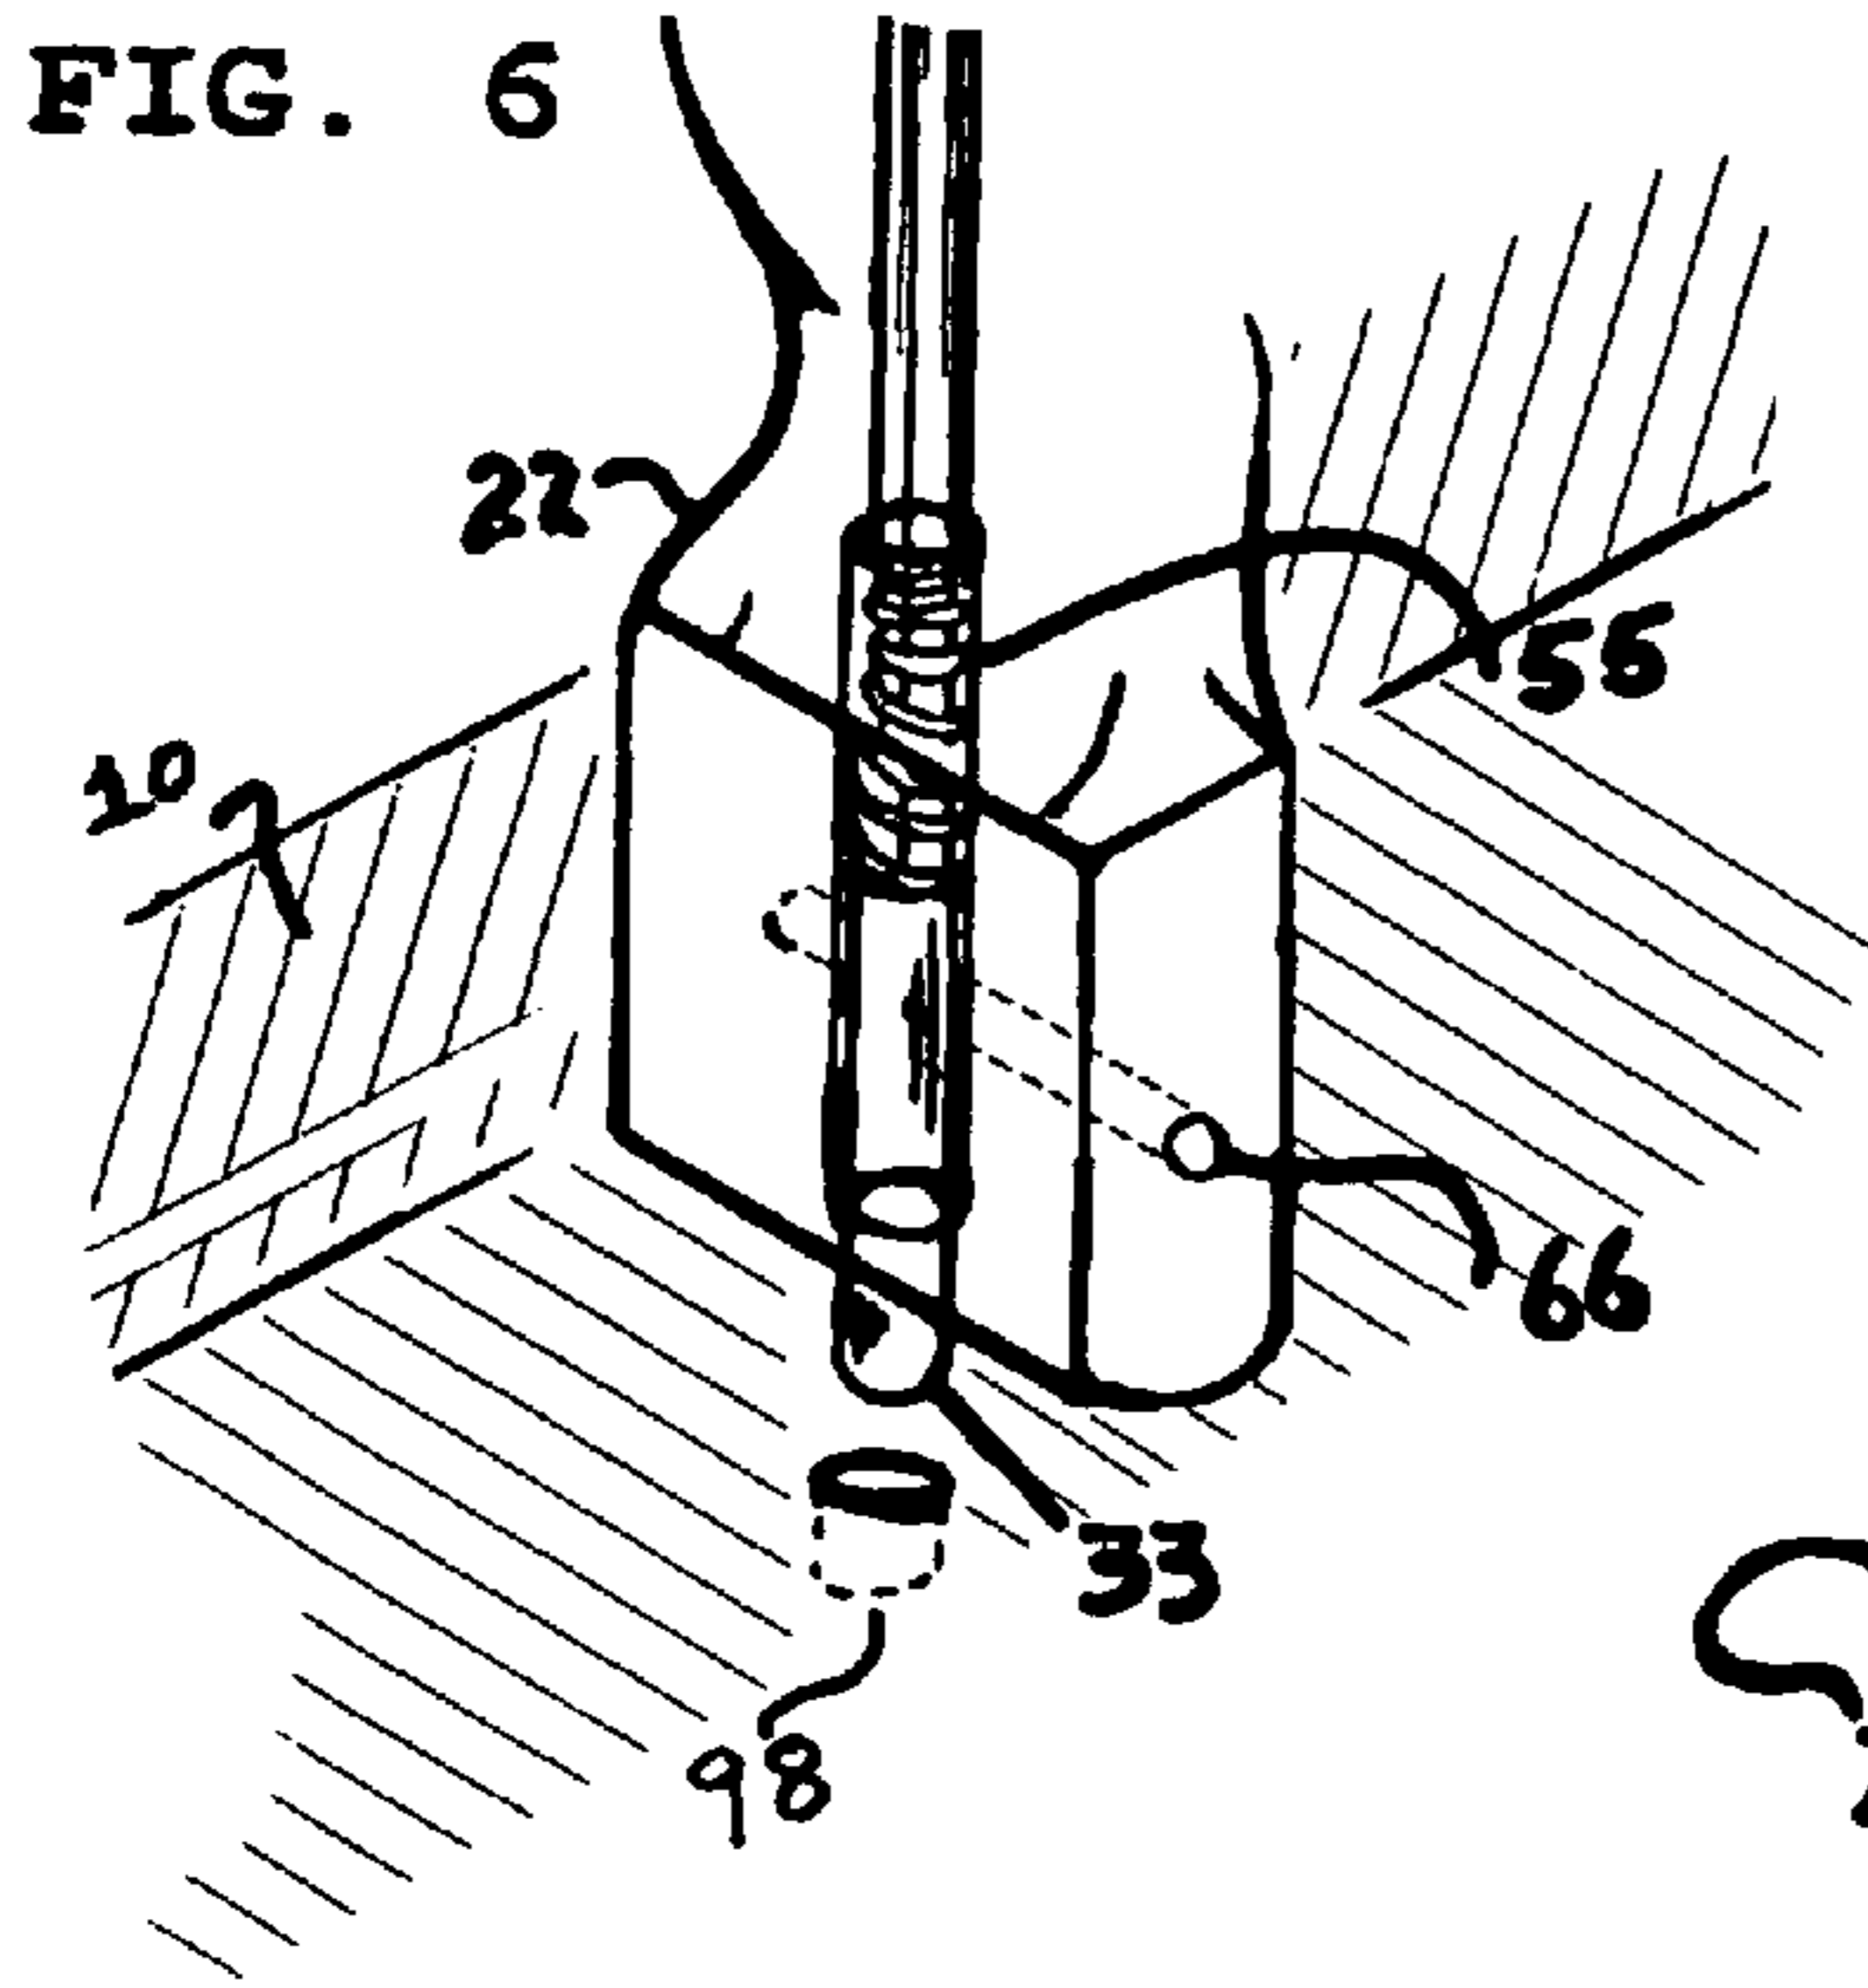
Cross section of the end of swivel *handle 22* set inside *handle housing 10*. The *detent pin 33* under pressure from *compression spring 55* begins to seat into *center retaining hole 98*.
